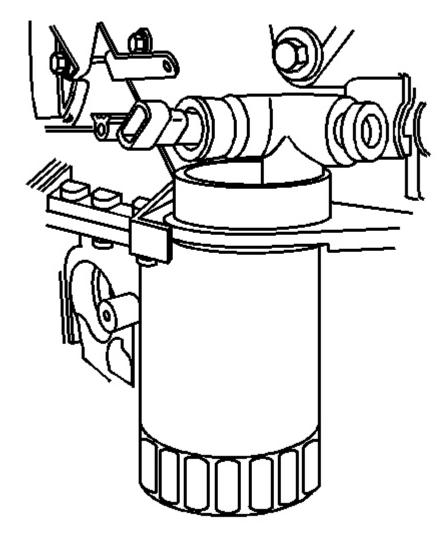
View Of Oil Pressure Switch & Connector Courtesy of GENERAL MOTORS CORP.
